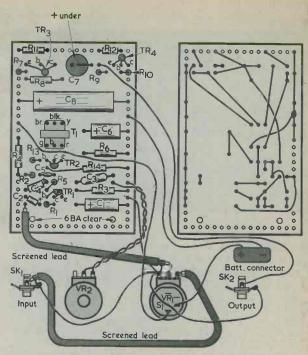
Component layout and wiring of the amplifier. For convenience of presentation the front panel controls and sockets are shown in the same plane as the component board. The positions of the controls and sockets can be readily ascertained from the photographs of the interior of the amplifier
